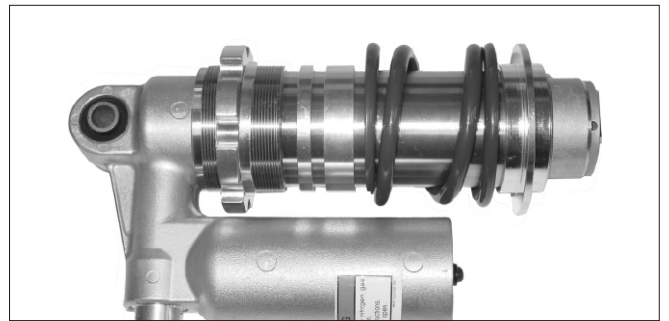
Install cross-over rings in the size and quantity specified on the part number sheets with each kit. Follow this with the initial spring and the first spring separator.
